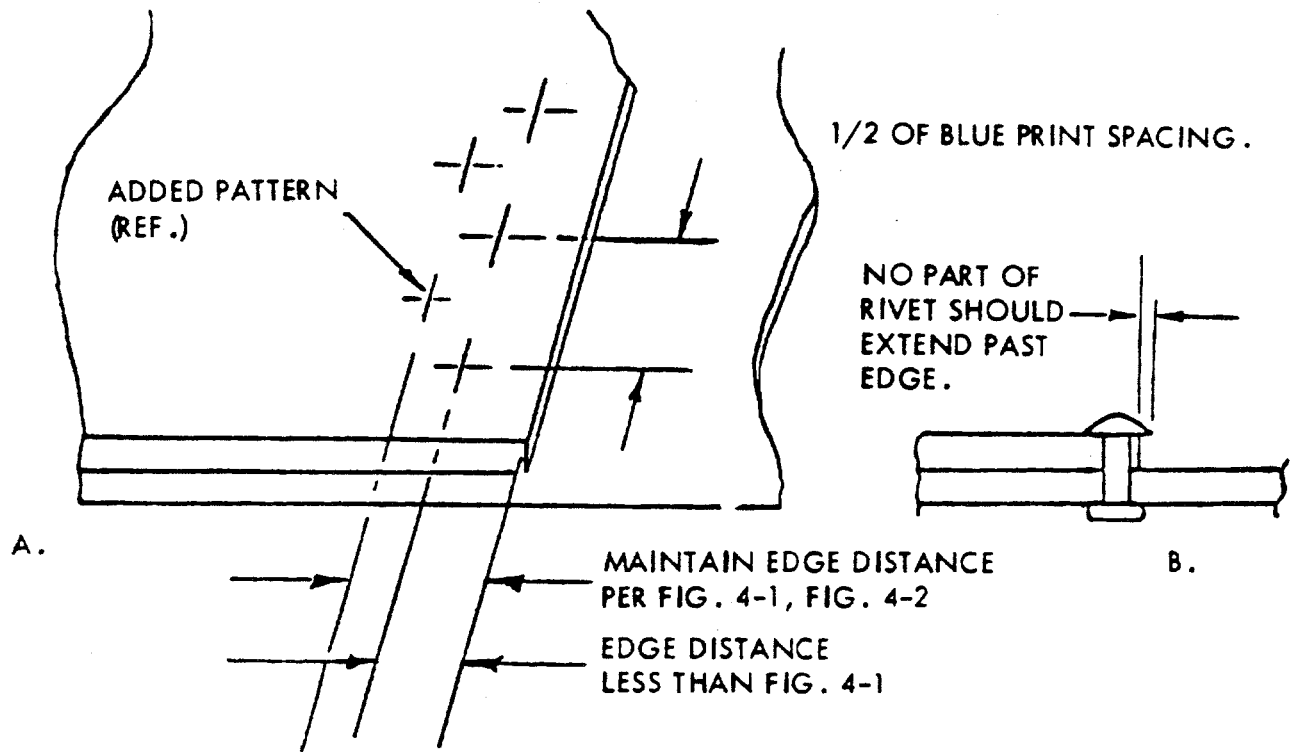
RIVET PATTERN SHORT EDGE DISTANCE
